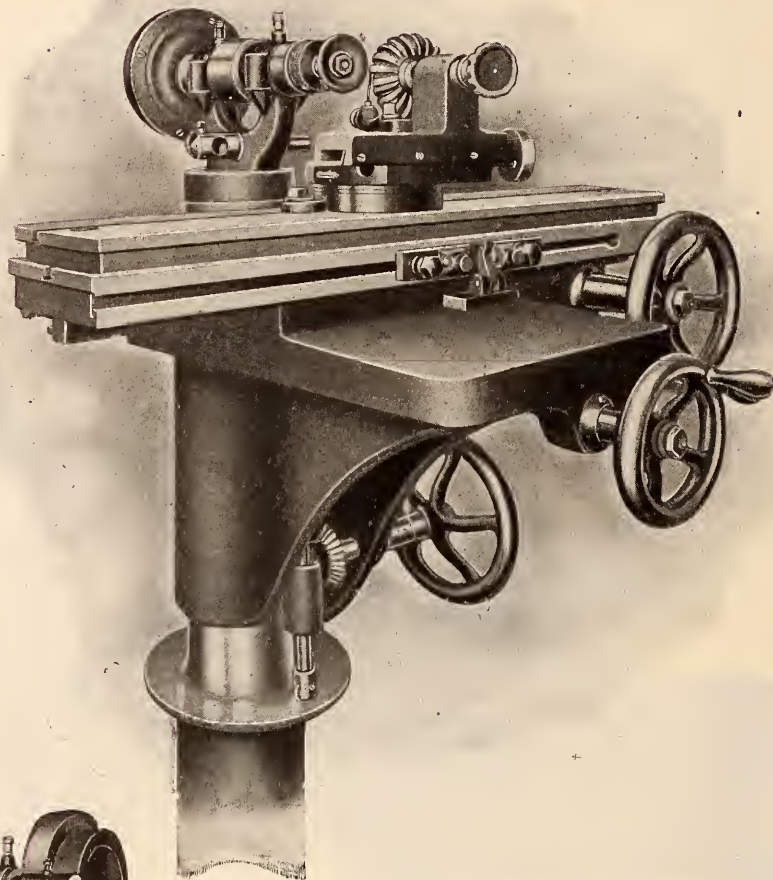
SPECIAL ATTACHMENT FOR GRINDING ROUND CONVEX CUTTERS.
